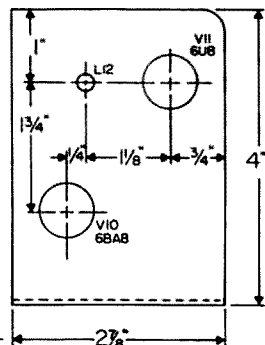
, right. Details of the new subassembly. Front view of the Twixer.
